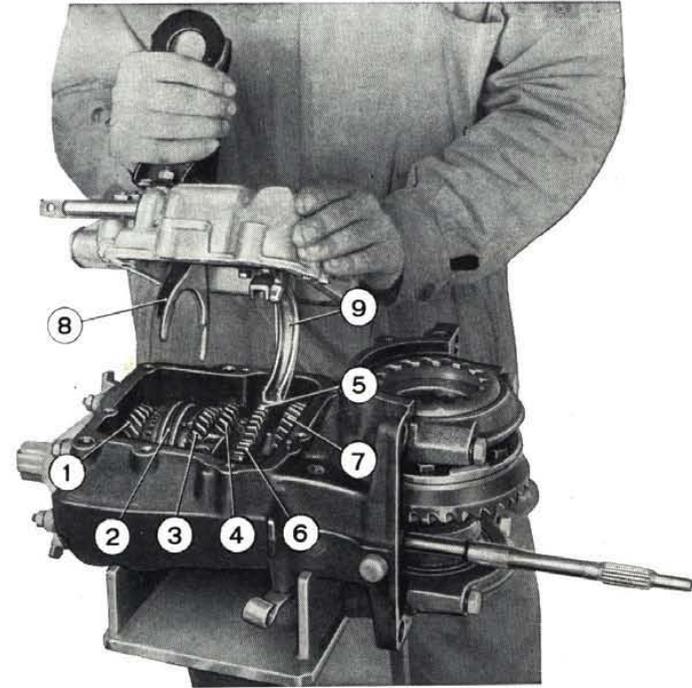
Removing side cover, complete with shifter rails and forks.
